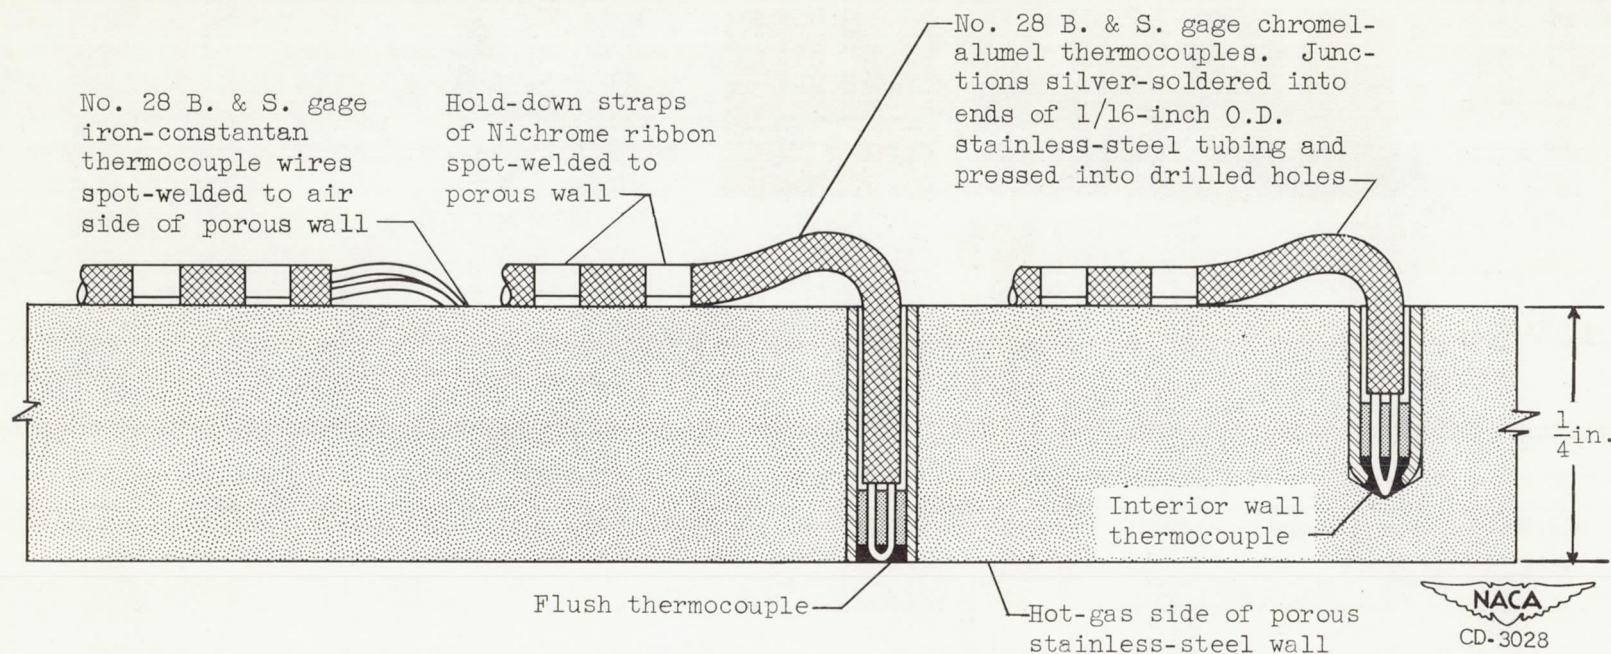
Sectional view of typical thermocouple installations on porous stainless-steel wall.
